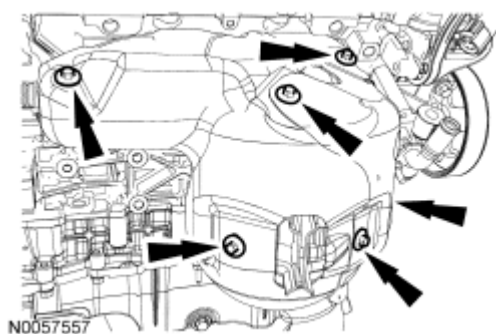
Locating RH Exhaust Heat Shield Bolts
